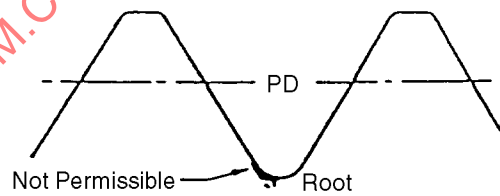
ROOT DEFECTS, ROLLED THREAD
